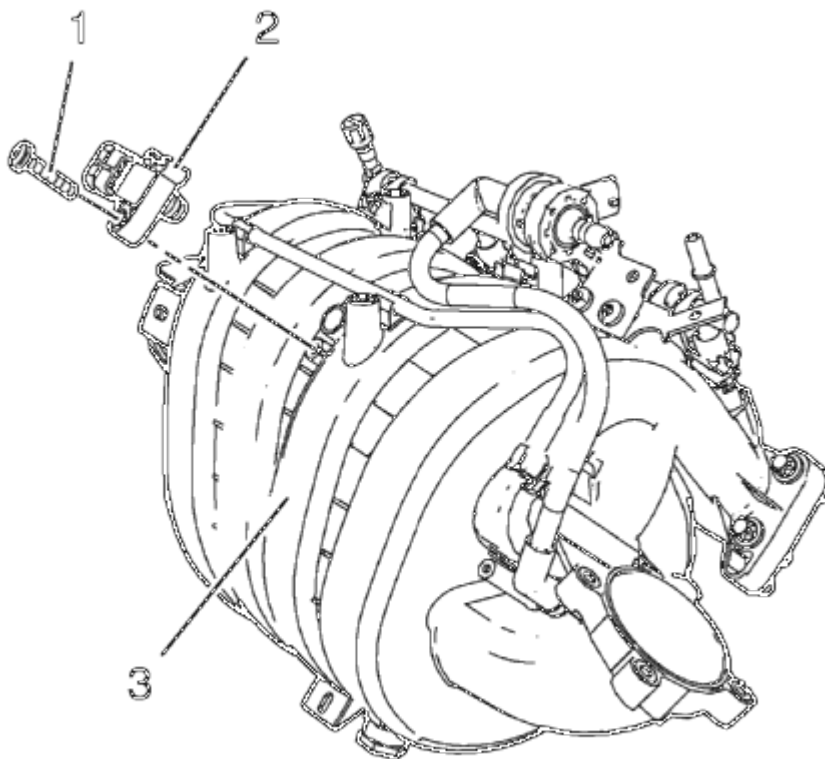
Intake Manifold, Manifold Absolute Pressure Sensor And Bolt
